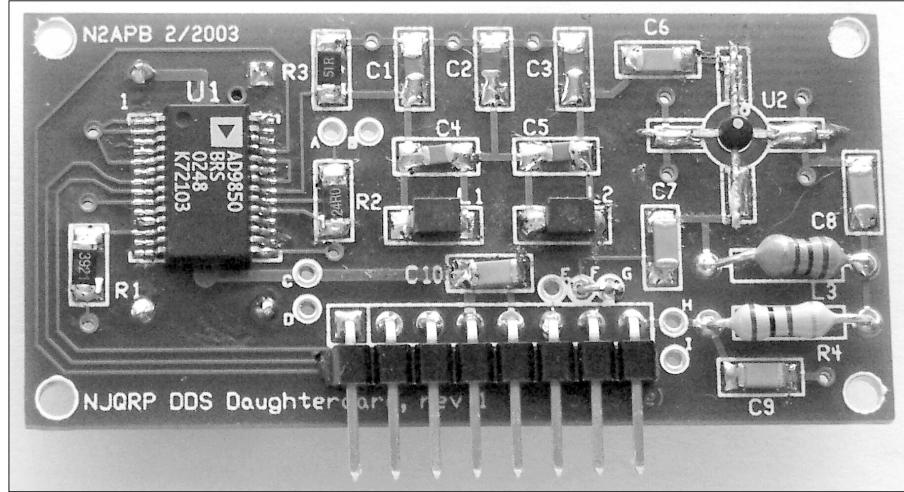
C — The fully-populated DDS Daughtercard PC board contains a mix of SMT and through-hole parts, showing how both packaging technologies can be used together.
